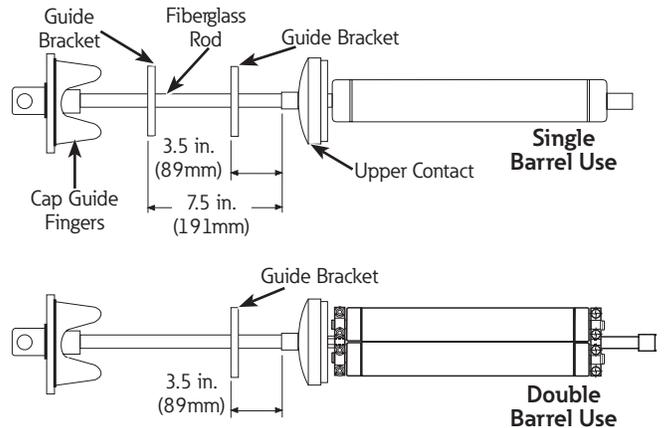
Fuse assembly consists of handle assembly plus ELSG fuse. (Plus guides, where applicable.)
